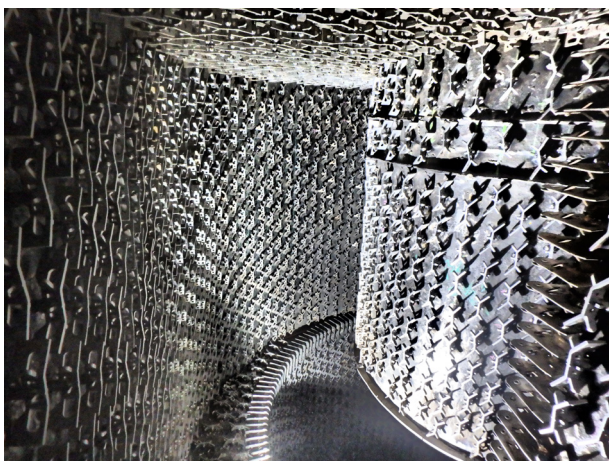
When installing thousands of anchors, the rapid fusion welding process can shave shifts off repair time compared to traditional stick welding.
